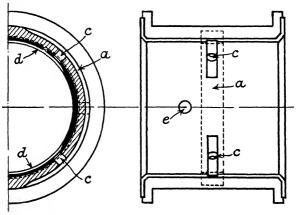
A.E.C. FLANGED CRANKSHAFT BEARING (No. 1)
